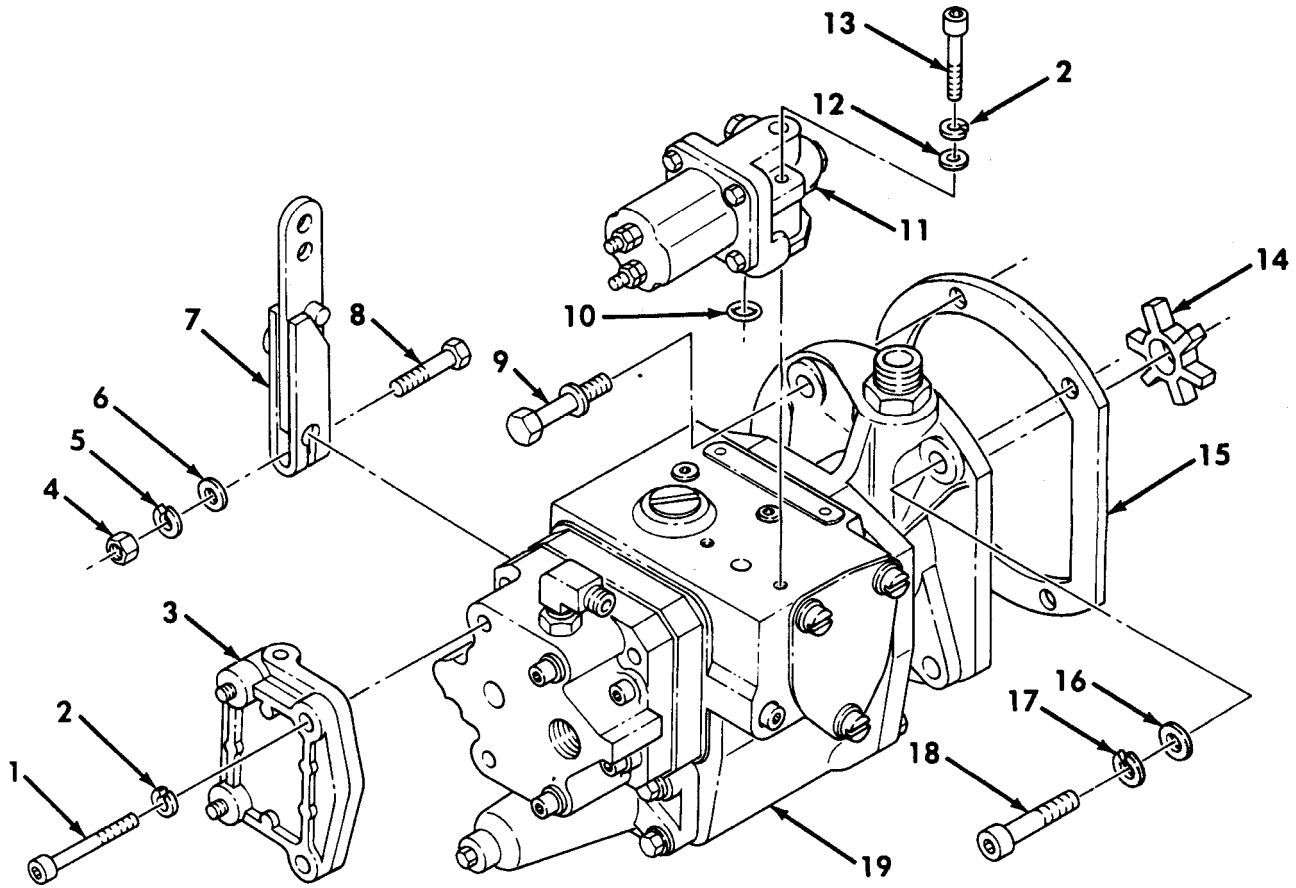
Fuel Pump, Shutdown Valve, Damper, and Mounting Parts.
